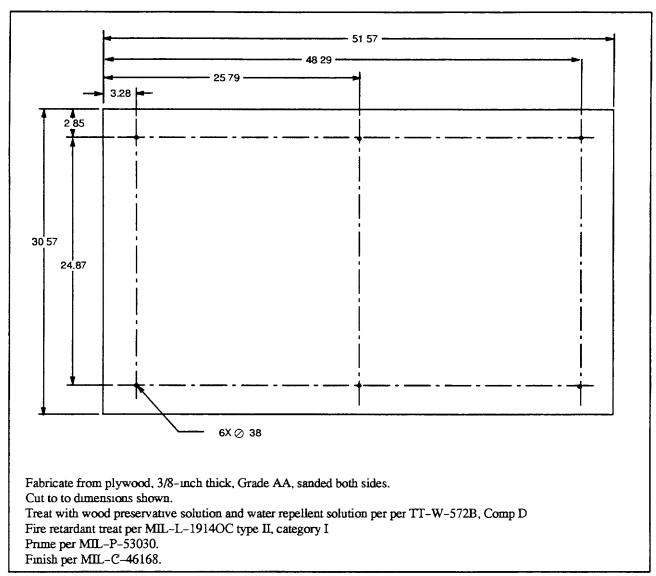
Deflector Assembly Storage Box, Panel Bottom
